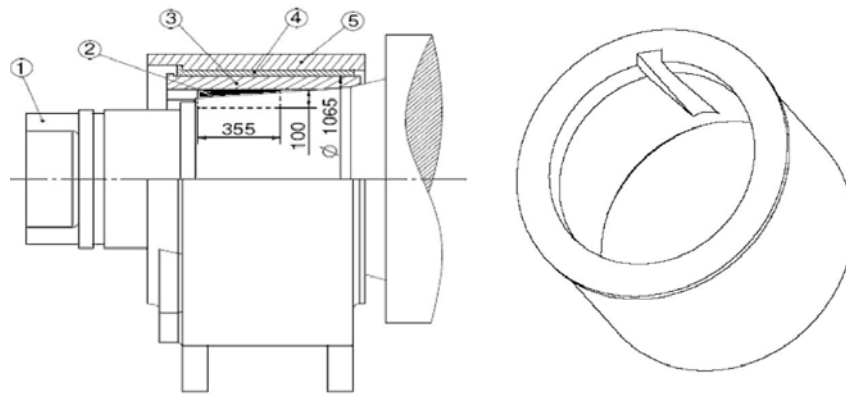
Left: key-type bearing assembly with roll (1), key (2), conical sleeve (3), bearing bushing (4) and bearing housing (5). Right: conical sleeve with key groove. [3]
